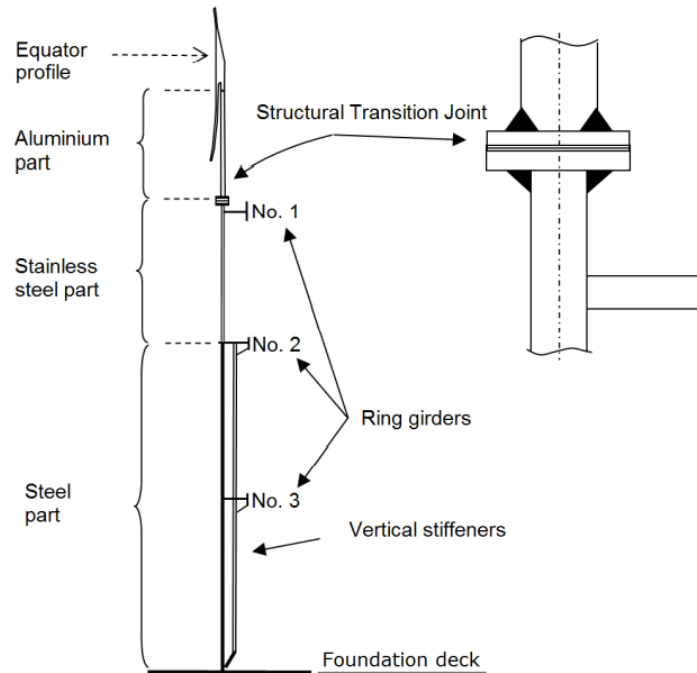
DNV, drawing of main geometry of tank skirt [12]
